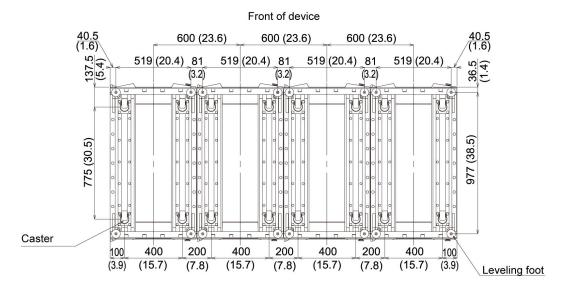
Bottom view drawing of connected 19-inch racks (slim)
